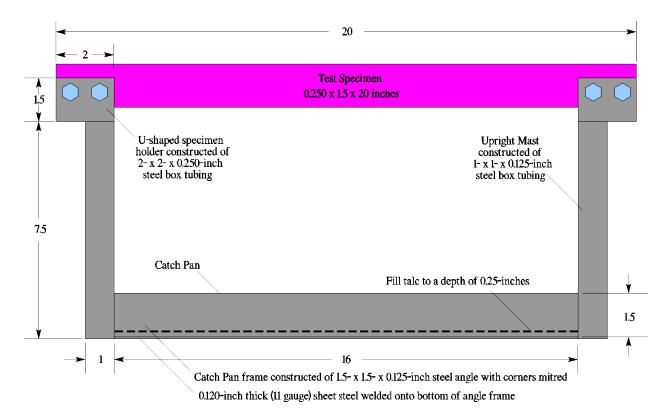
Magnesium Alloy Test Specimen Mounting Stand and Holder (front)
